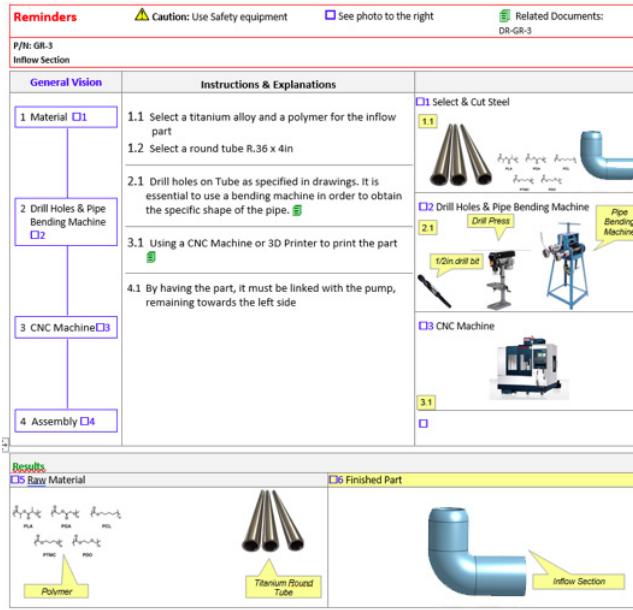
INFLOW GRAFT MANUFACTURING SHEET
